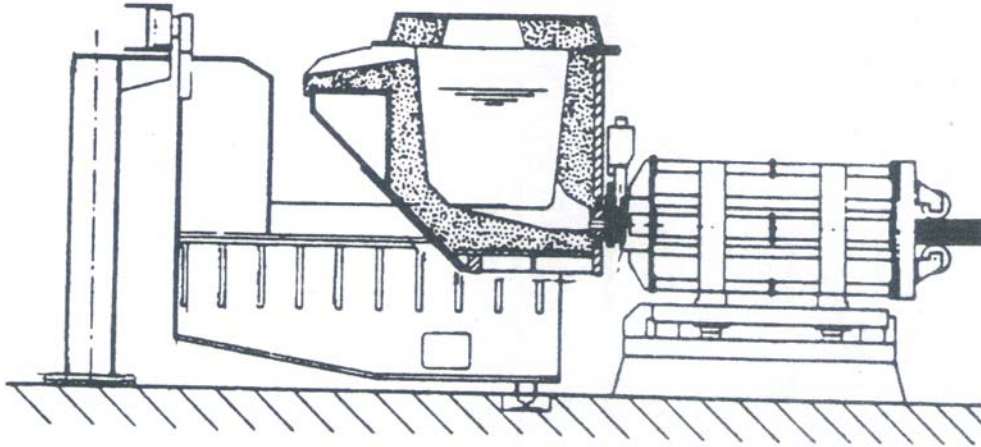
Horizontal caster with stationary mould and movable tundish in casting position
